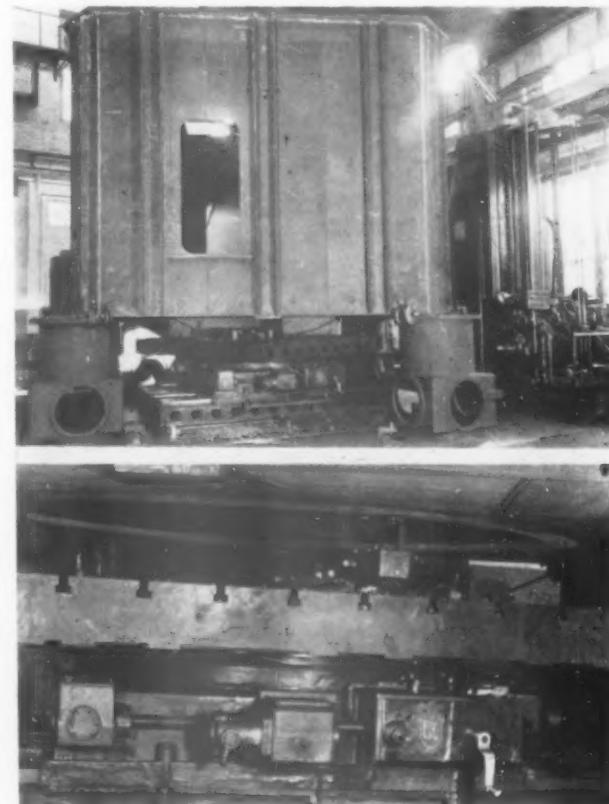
Machining the bottom bearing of a weldment approximately 16 ft. square and 13 ft. high. The part is mounted on blocks (discarded castings being used here) and the whole clamped to a large floor plate. A planer head is mounted on rotary table centered with the bearing ring and the bearing is faced by feeding from inside-out. FIG. 6, below, shows the cutting tool in action.
